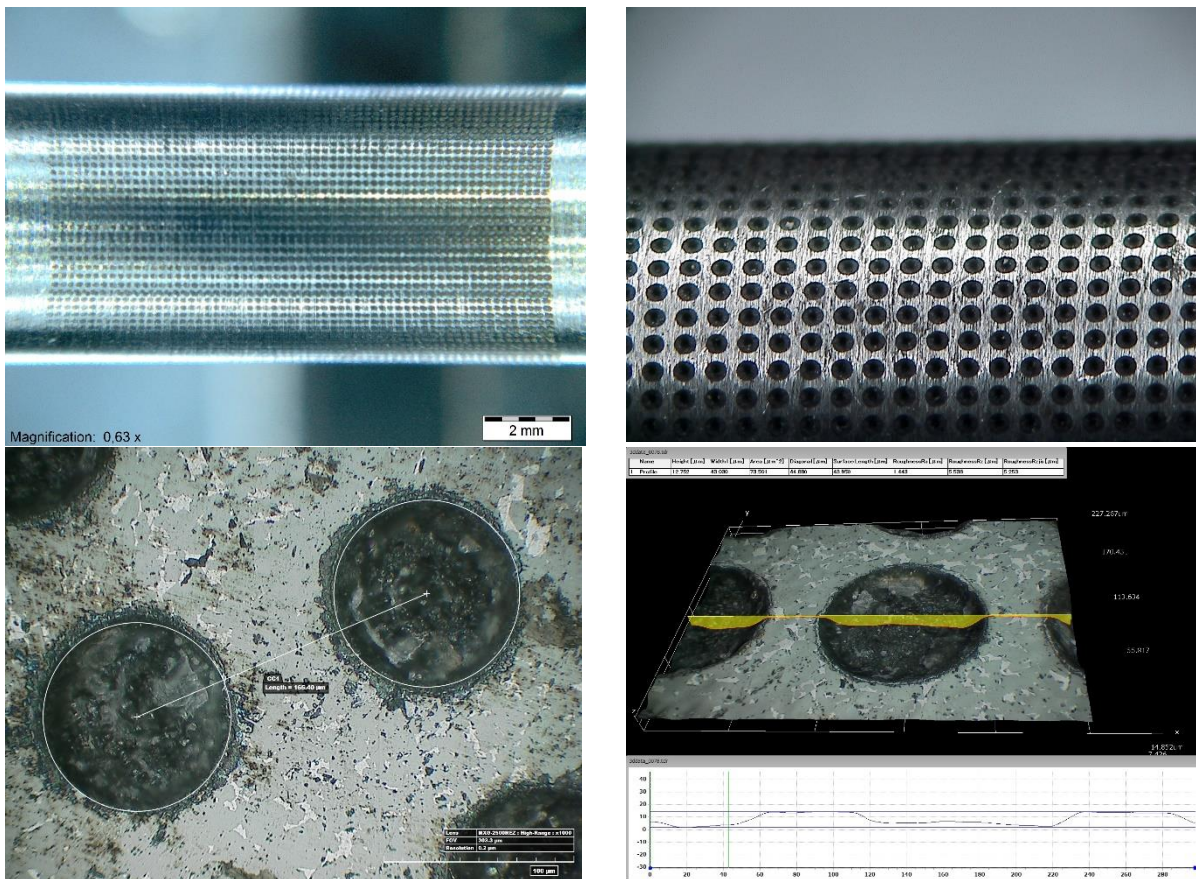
View of the fragment of the report documenting textures carried out on the tang of the testing mach
